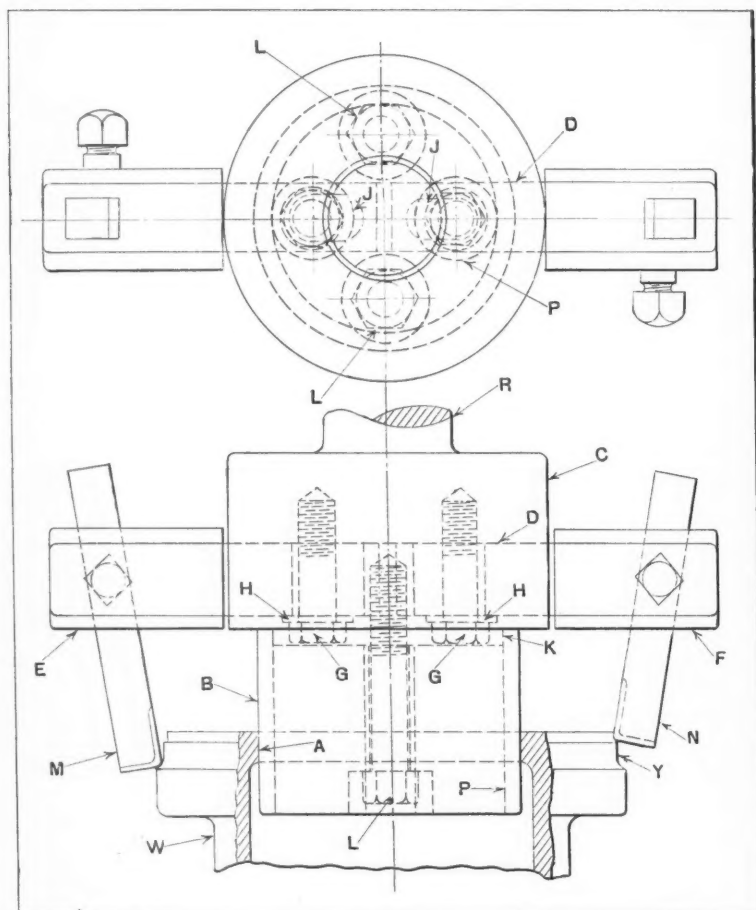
Tool for Rough- and Finish-turning Crankcase Neck
